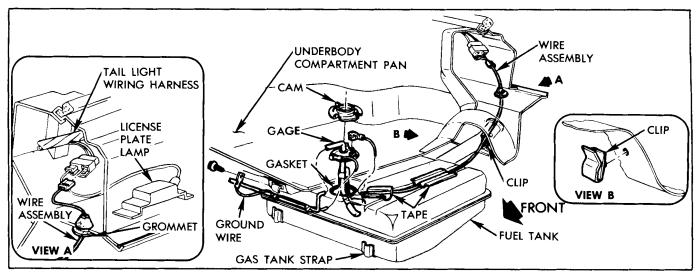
Fuel Tank Gage Unit Wiring (X Series)
